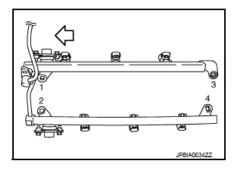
Identifying Fuel Tube And Fuel Injector Assembly Mounting Bolts With Tightening Sequence Courtesy of NISSAN NORTH AMERICA, INC.
